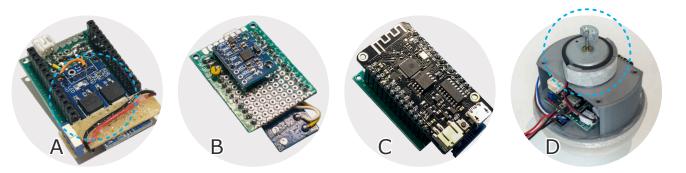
Exposed view of 2nd iteration; Double-side PCB is used to contain more chips (figure 20A, B); Dual-core ESP32 is used to placed single-core ESP8266 (Figure 20C)
